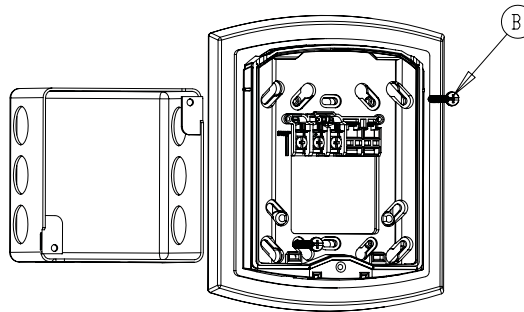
Assembly Attachment to 4  $\times$  4-inch Back Box
